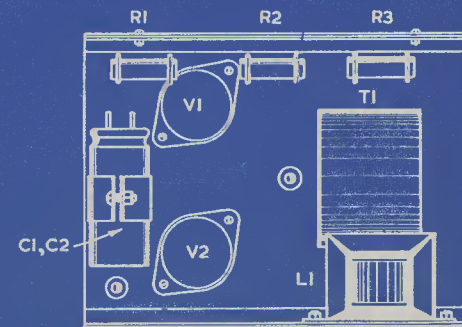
COMPONENT LAYOUT ABOVE CHASSIS
